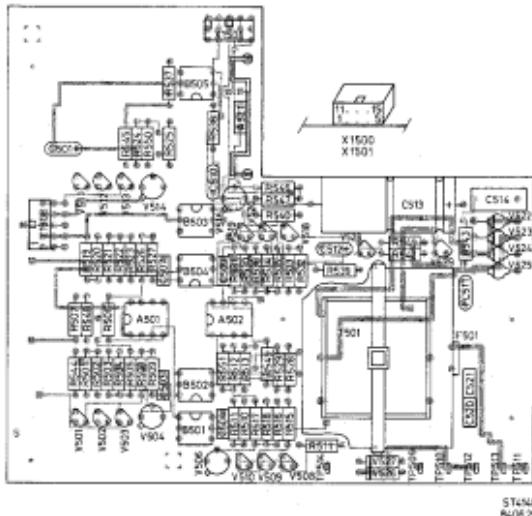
Galvanic separation p.c.b., lay-out, conductor side
